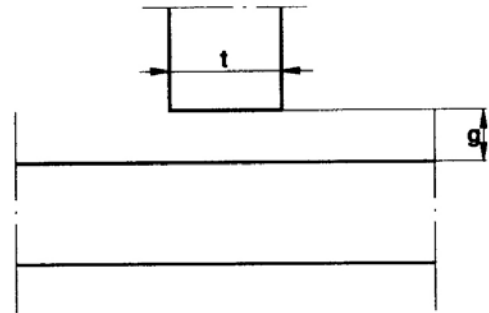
Gap in Fillet Weld T Connections
